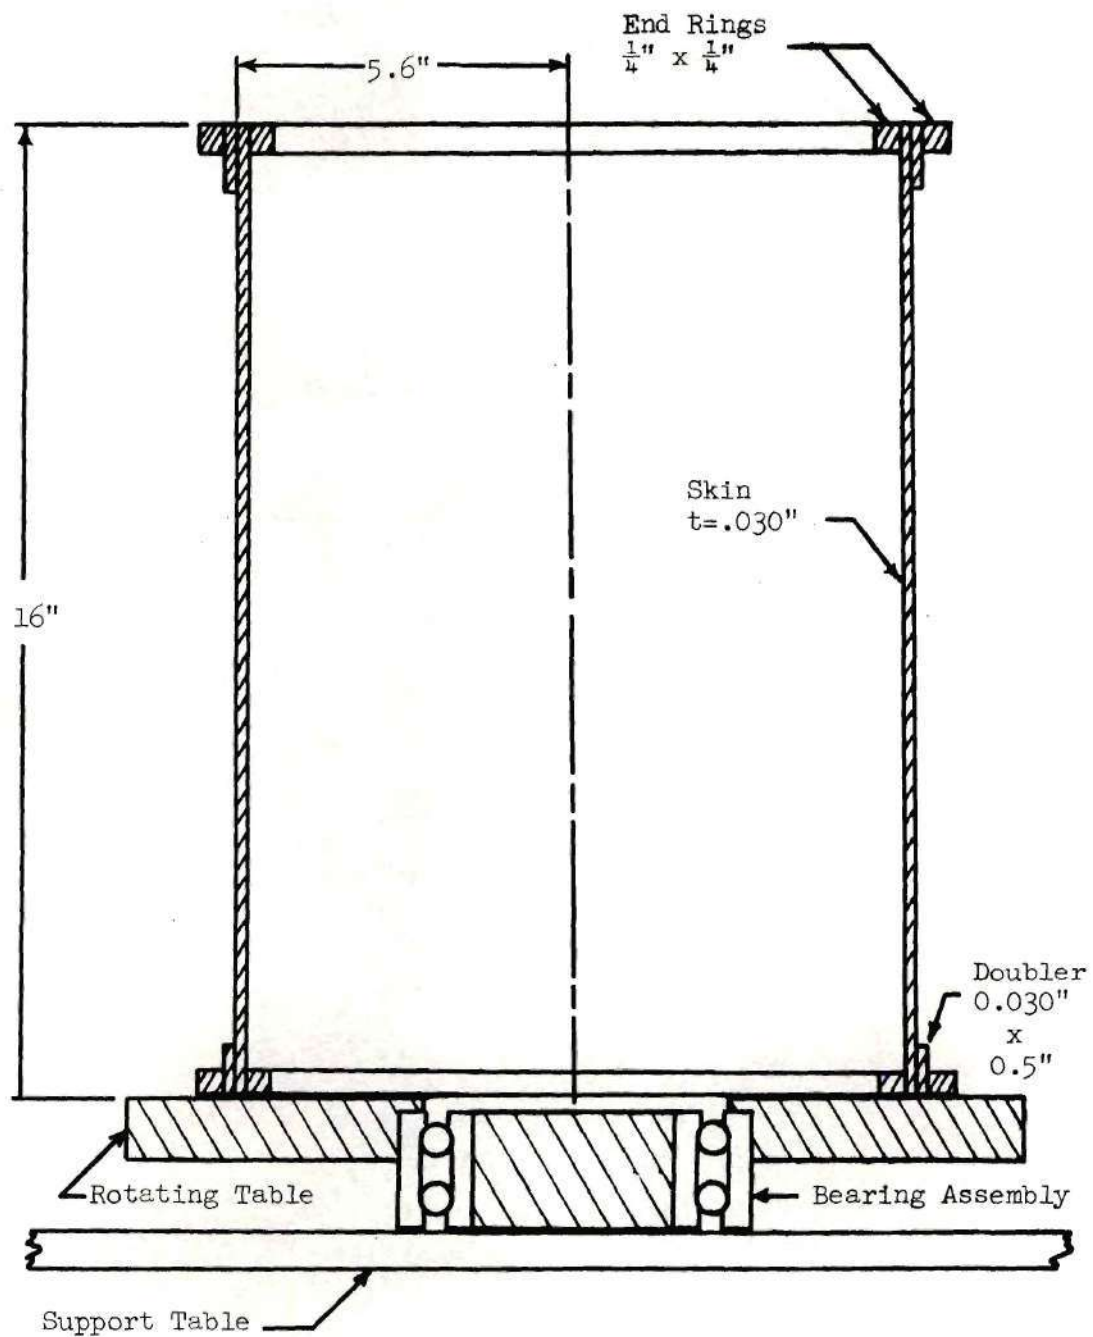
Monocoque Cylindrical Shell Cross-Section and Rotating Table Assembly for Small Specimen Scan.
